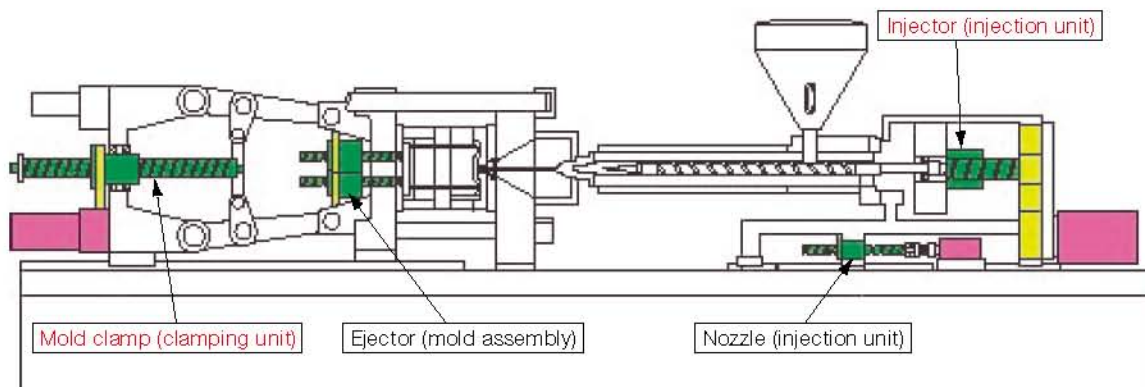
Areas where ball screws are used in all electric injection-molding machines
